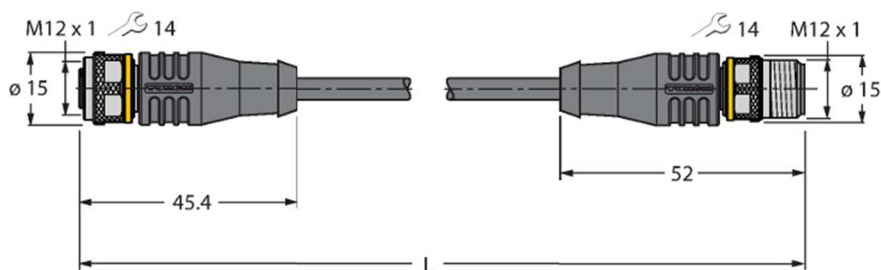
Standard Male-Female cable M12x1 4P A-Code (CAB-0001) – Dimensions in mm
